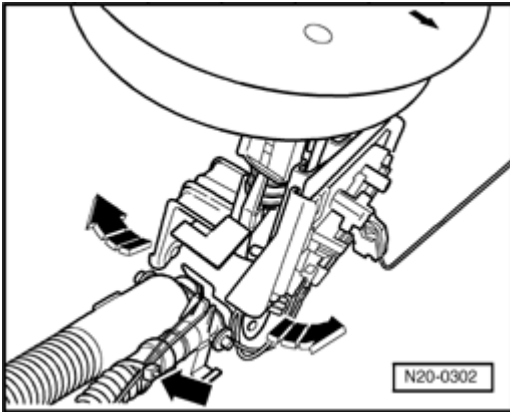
Separating Cable Ties From Fuel Lines & Spreading Apart The Mount For Suction Jet Pump On Fuel Level Sensor 2
